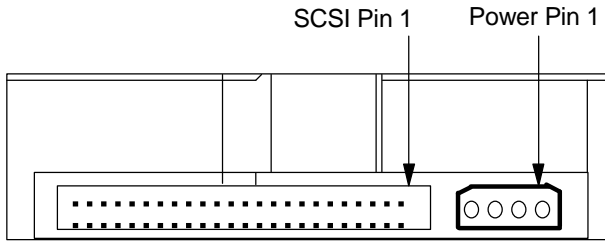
Electrical Connectors (rear view) 50 Pins SCSI
